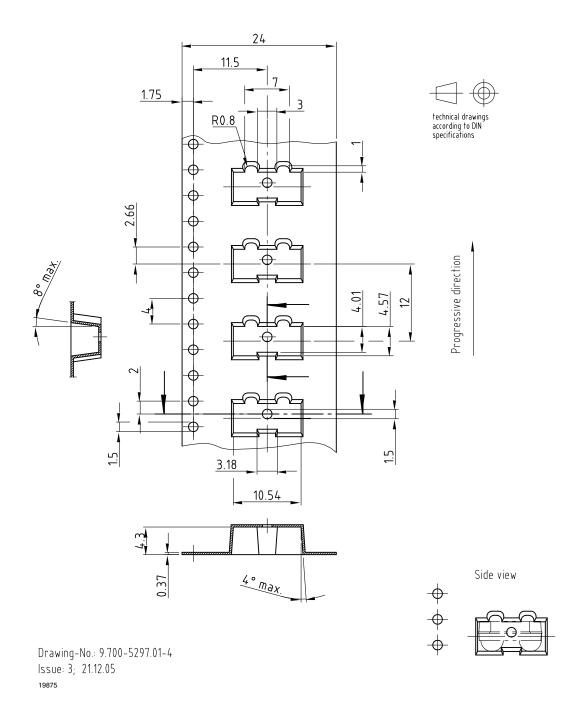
Tape Drawing, TFDU4101 for Side View Mounting, Tolerance \pm 0.1 mm
